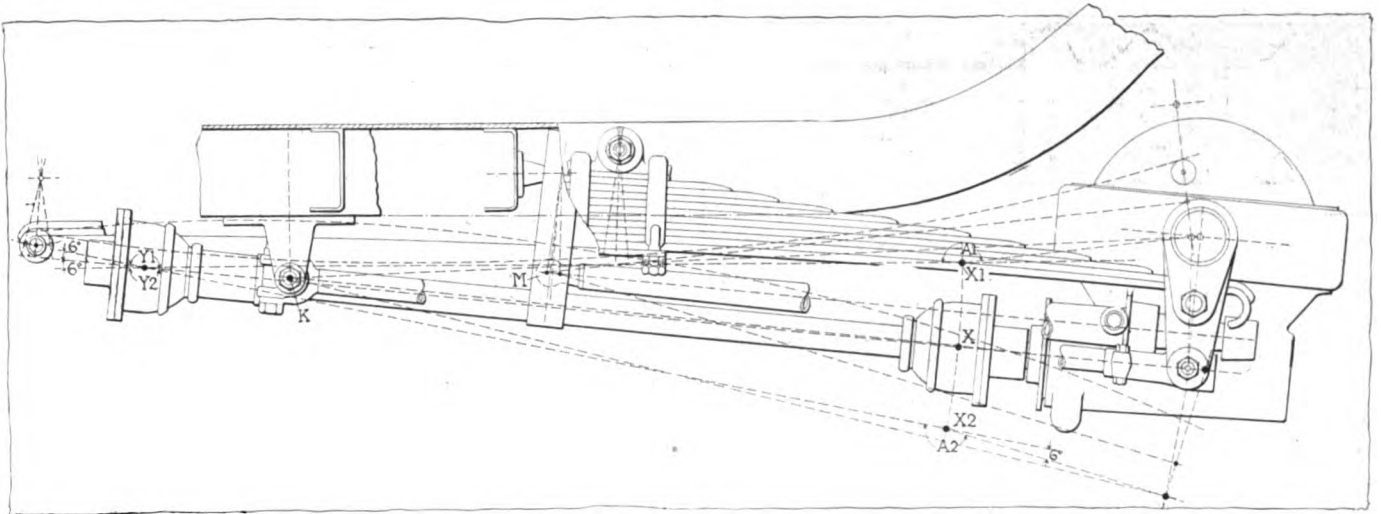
Diagram explaining the action of the torque rod and distance rods which is such that no sliding takes place in the universal joints of the propellershaft
